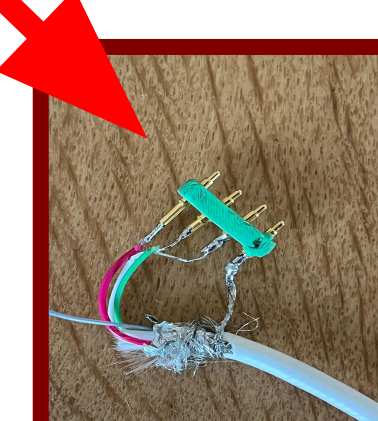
Soldered USB Into 3D Printed Pogo Pin Holder
